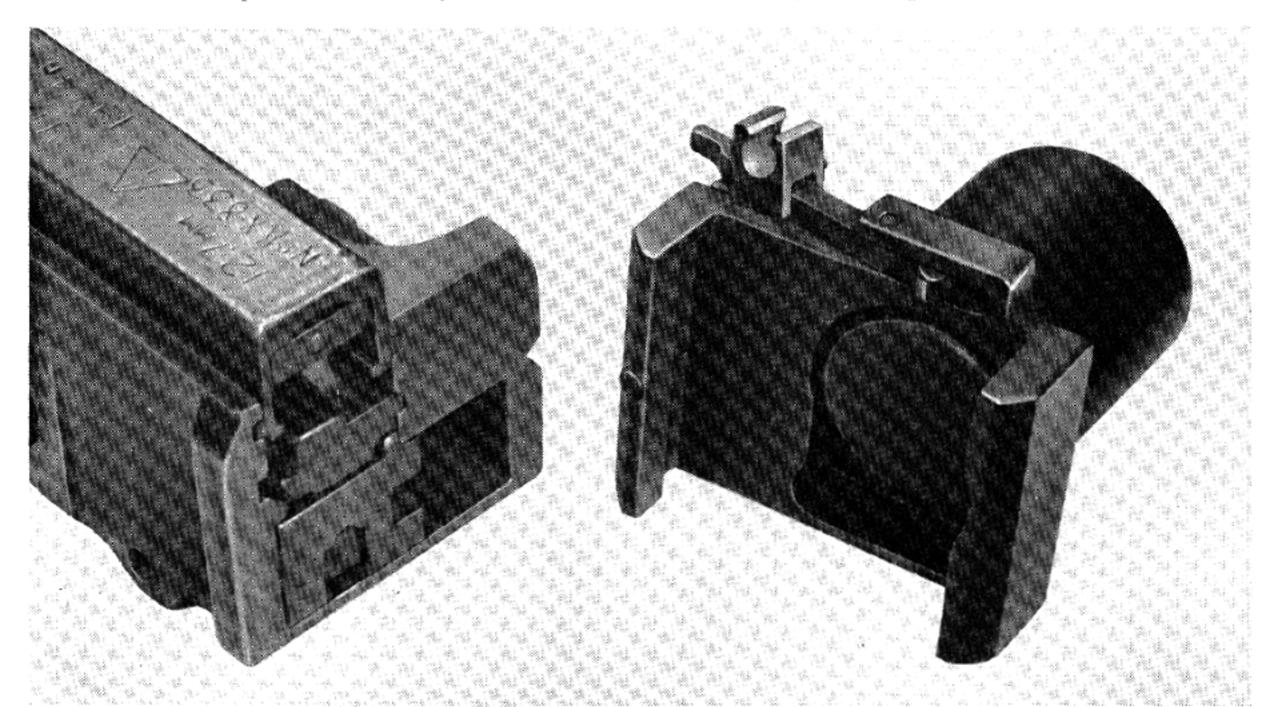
Rear of the receiver of the Beresin Machine Gun, showing backplate with buffer removed. This method of gun construction uses the backplate to prevent spreading tendencies of the sideplates.
